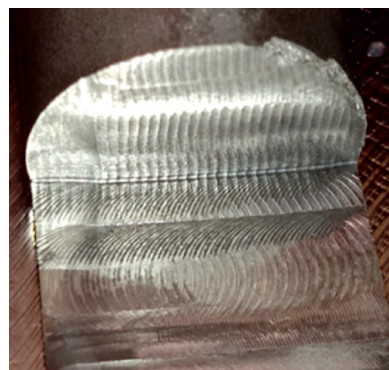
Sample surface after machining with JJ Tools 4SUE080120S08
